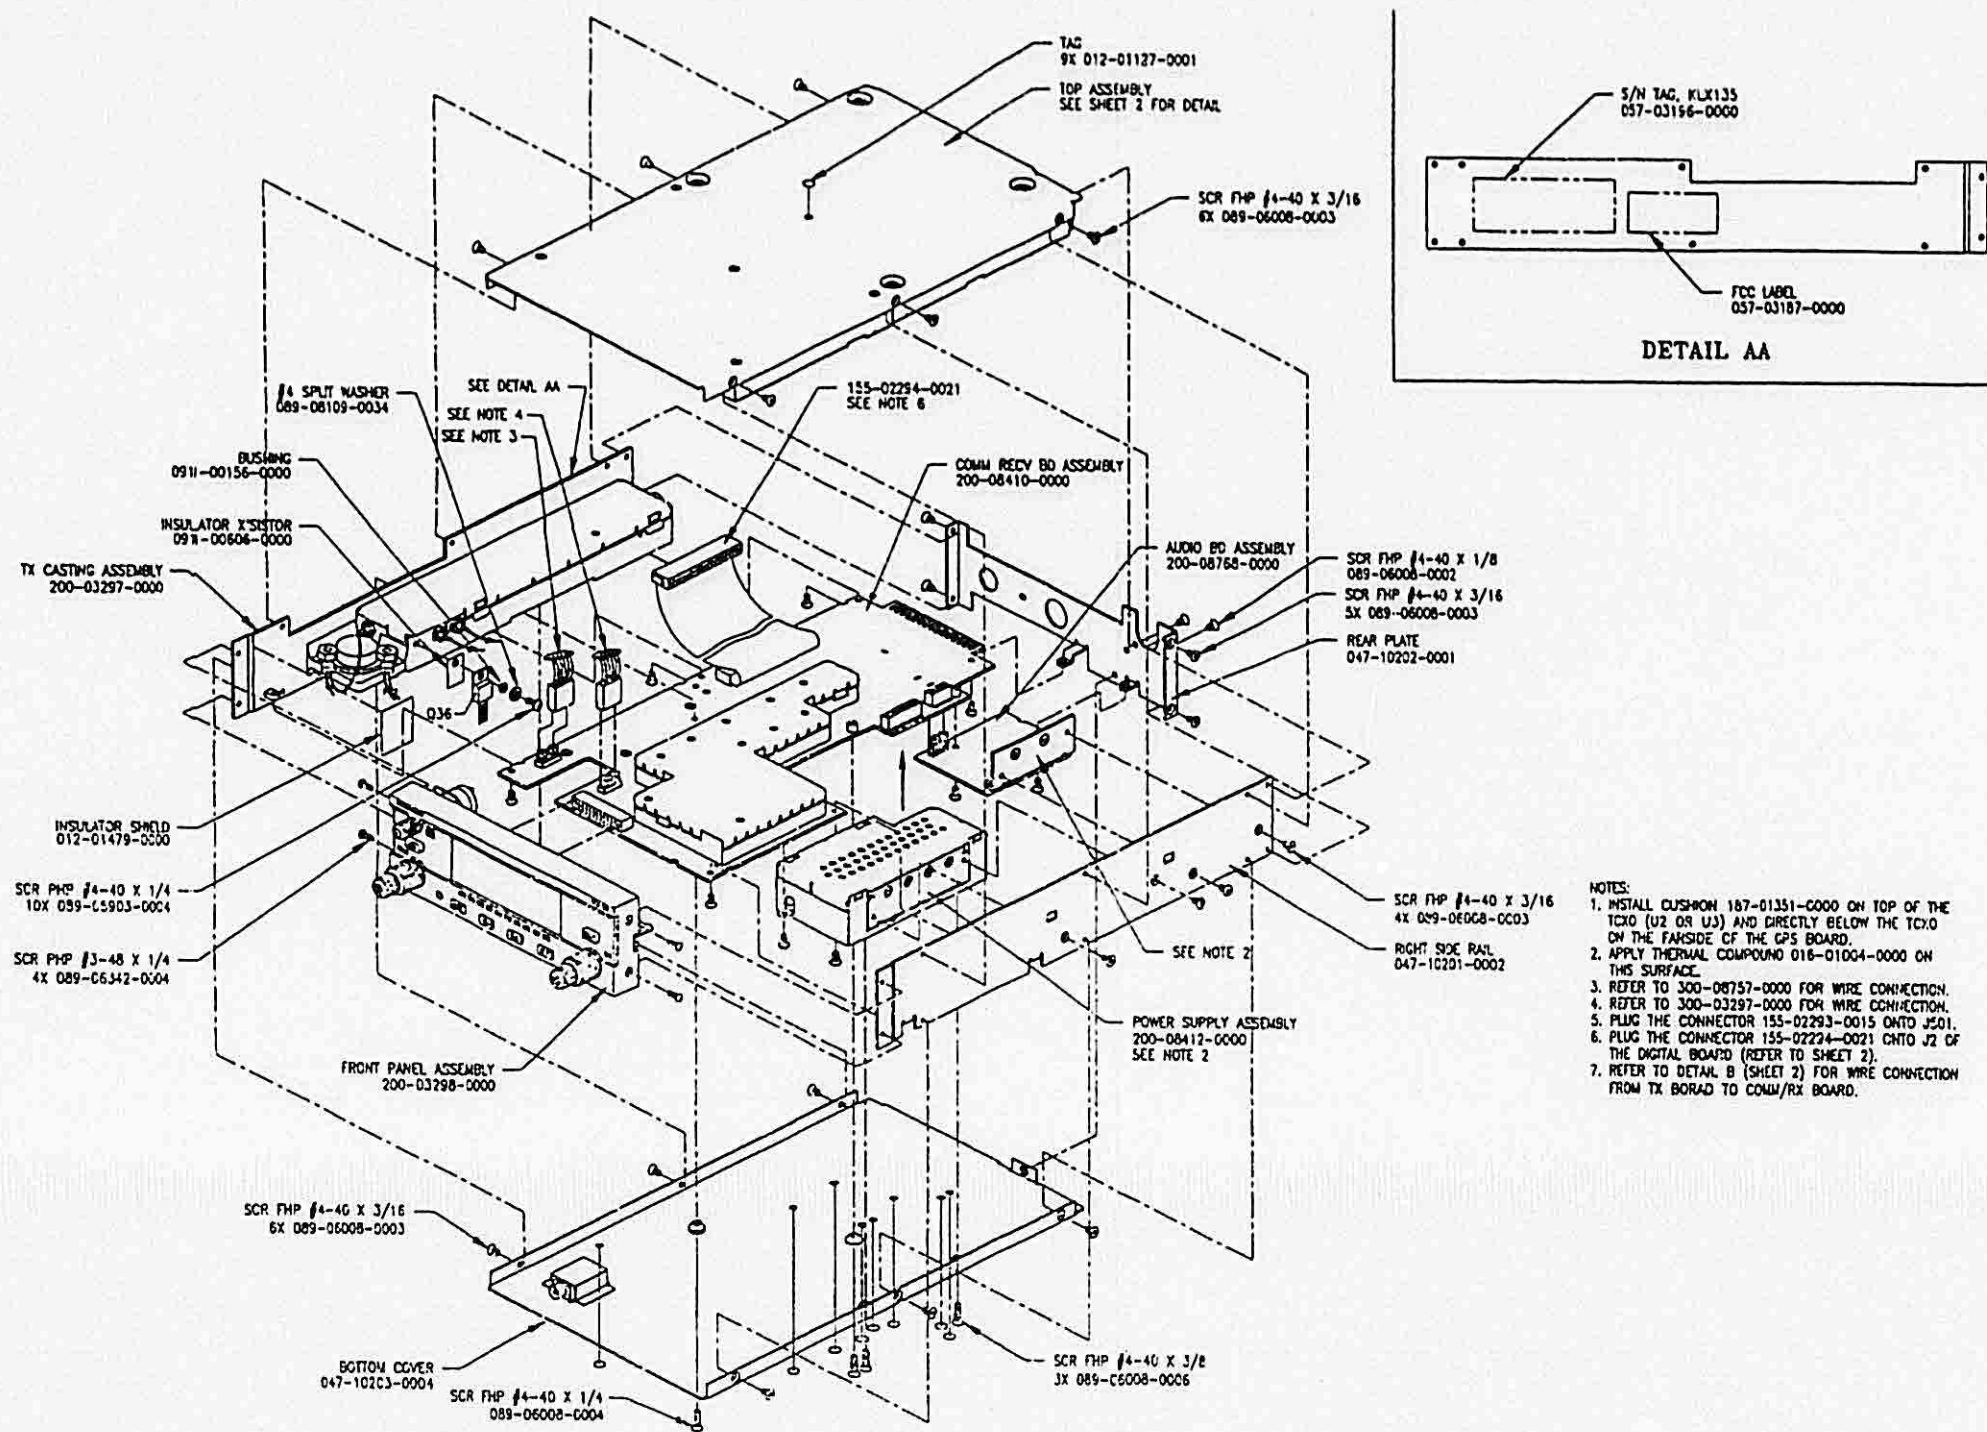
KLX 135 FINAL ASSEMBLY
